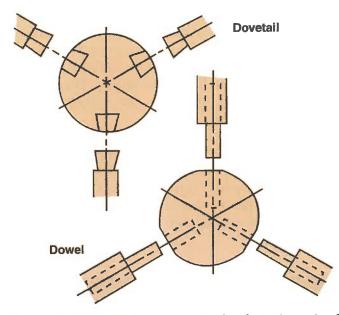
Typical wood joints for fastening tripod legs to a pedestal.
